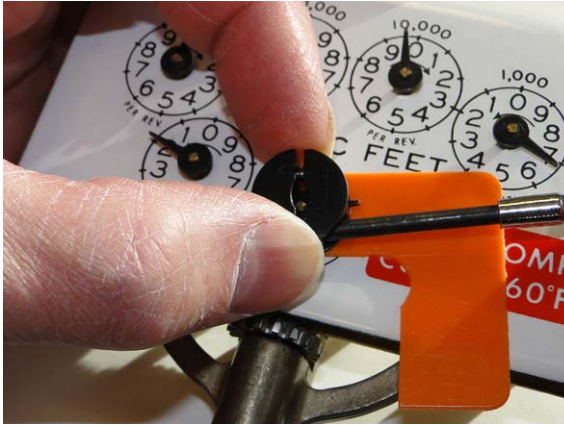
7. Insert 0.030 inch thick clear Shim and alternately tighten the Dial Wheel Screws to 3.5 inch-pounds (± 0.50 inch-pounds).
